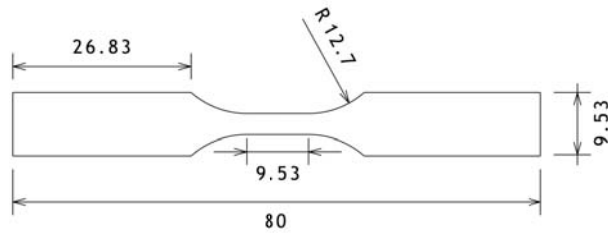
Bulk adhesive specimen’s dimensions (values in mm).
